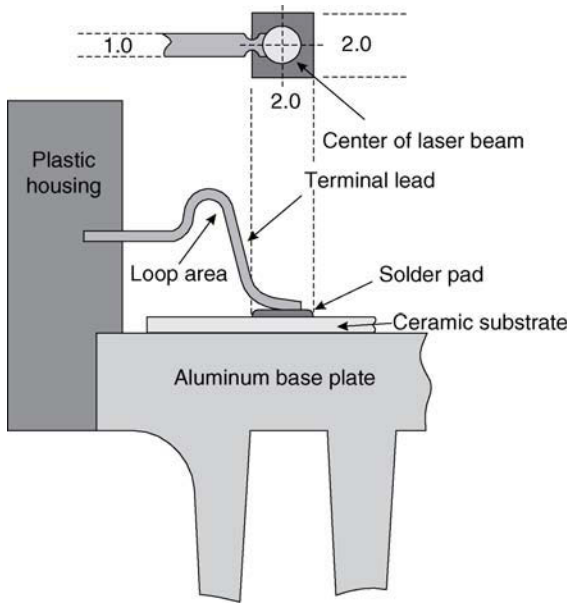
Solder joint configuration (dimensions in mm).
